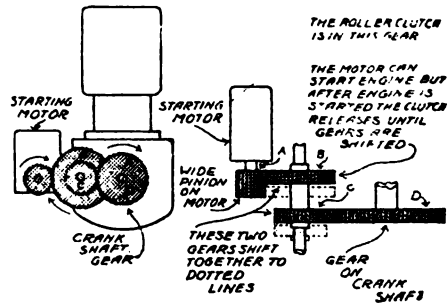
Showing application of starting motor to crank shaft by gears. Note clutch is in B. The Westinghouse starting motor is connected in this manner on the Dorris car. A feature worth mentioning is that the gears are all out of mesh after motor serves its purpose. (see page 328.)
